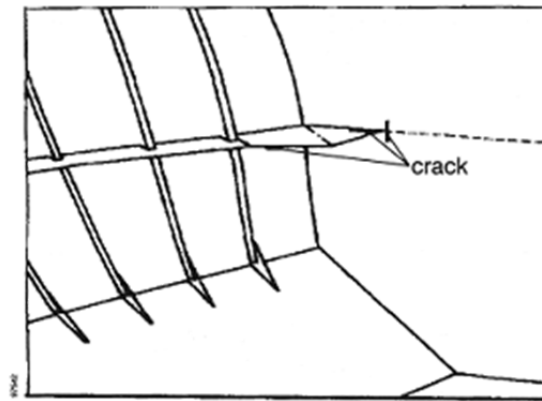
(1) Cracking around the collision bulkhead
